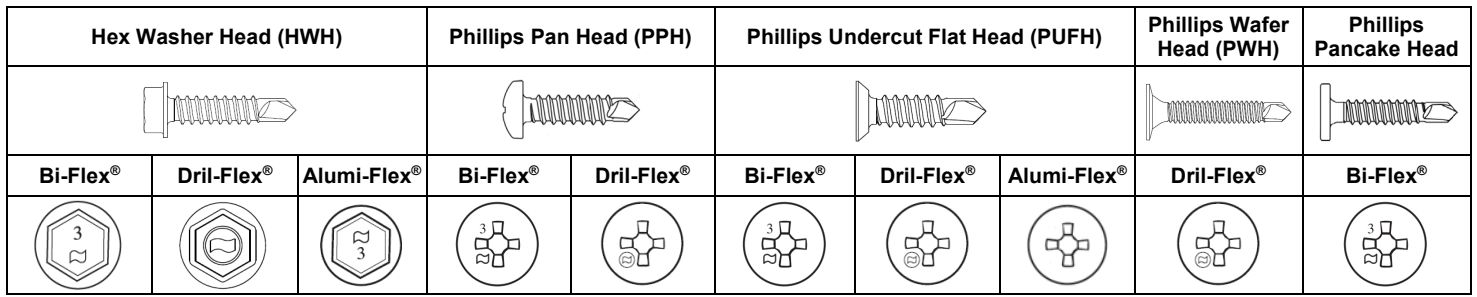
SCREW SHAPES AND HEAD MARKINGS
